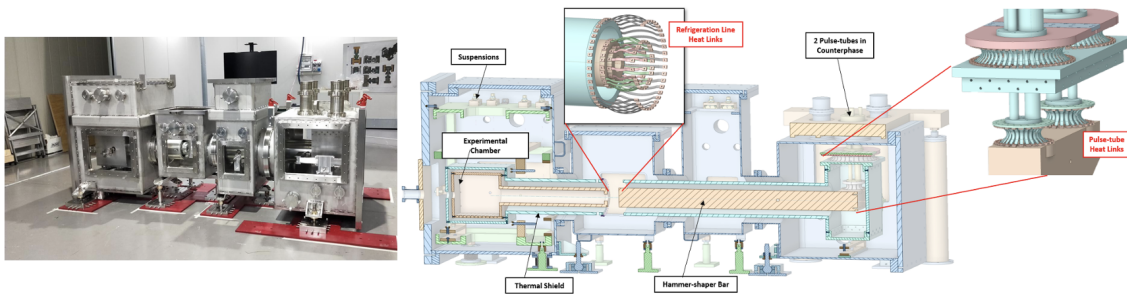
Left: mechanical assembling validation of the cooling duct prototype developed at ARC. On the left side the test-jig chamber, dedicated to cryogenics and vibration tests is shown. Right: assembled drawing of the cooling duct prototype developed at ARC. The soft links are enlightened. Their design will be adapted to match the prototype constructed after the complete cryogenic modelling.
